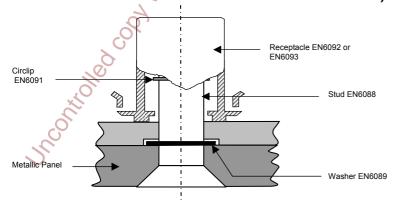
Example of final assembly – 2 - start EN quick release system (metallic panels without metallic inserts)
